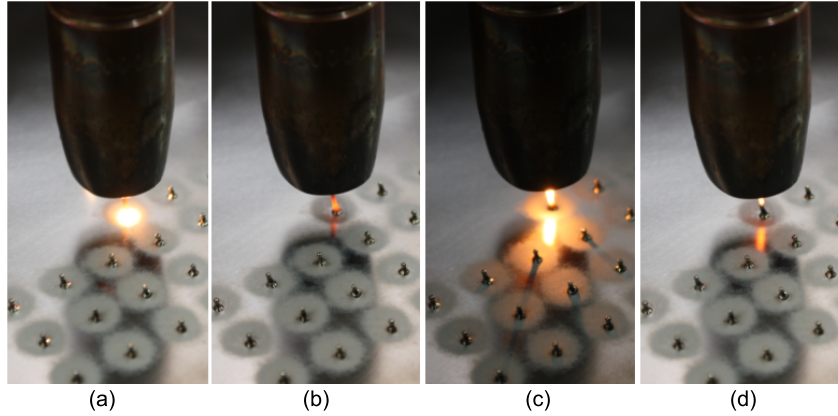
Photographs of CMT welding during the four phases of the pin manufacturing process.
